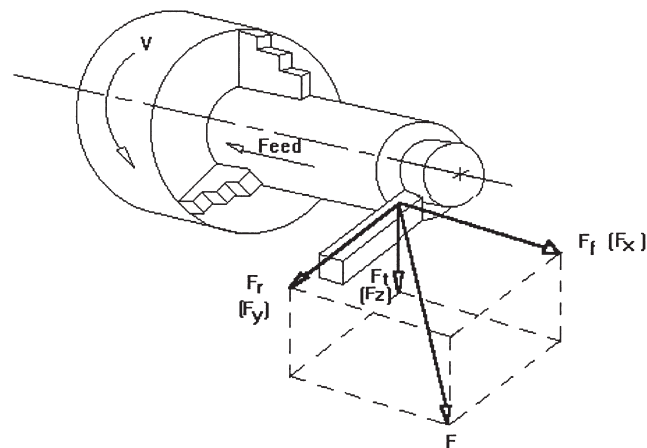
Forces acting on a cutting tool in orthogonal metal cutting.
